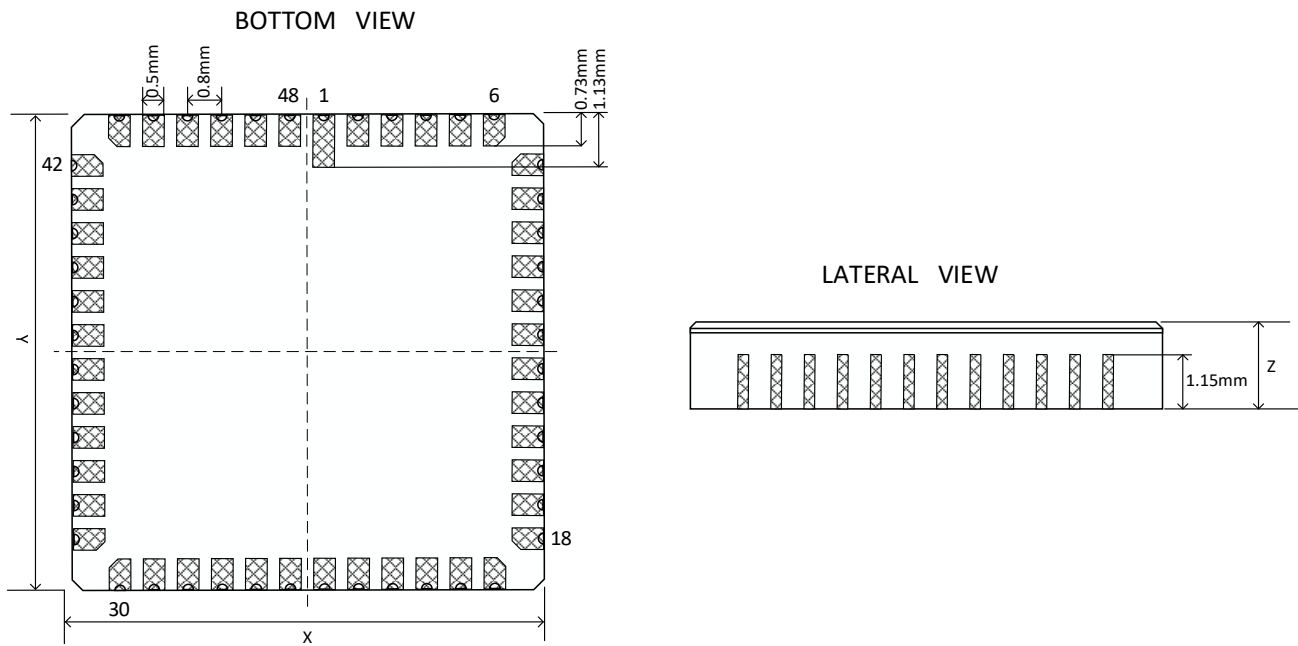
Chip Dimensions (Left: Bottom View, Right: Side View)
